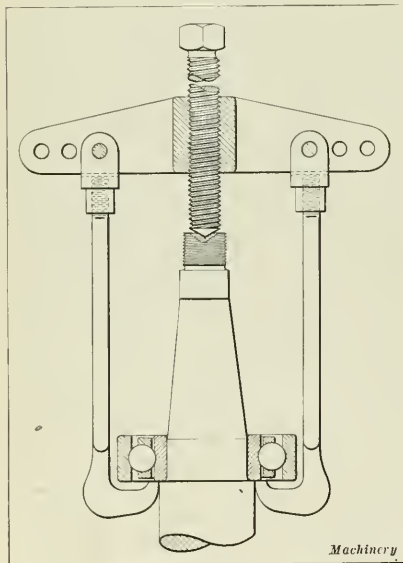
"Bearing Puller" for removing Ball Bearings from Shaft
